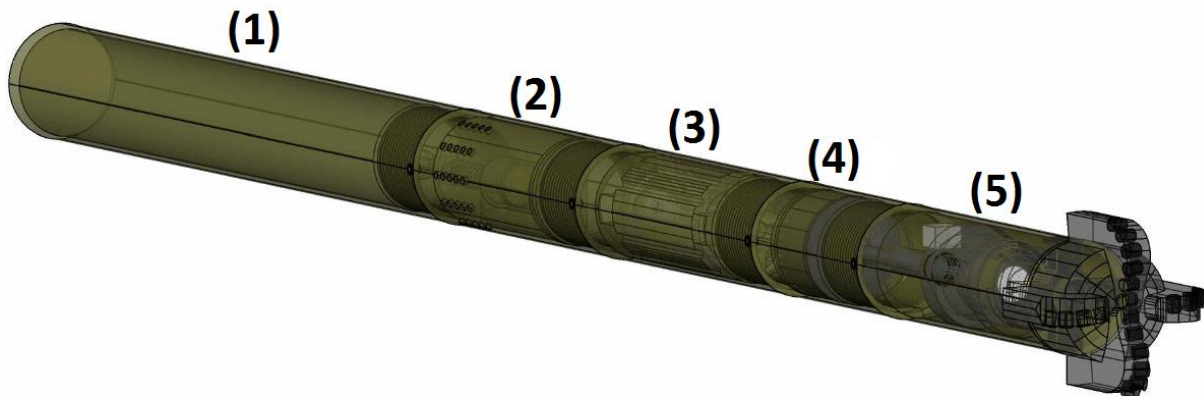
X-ray picture of ultrasonic tractor equipment, divided in five sections.
